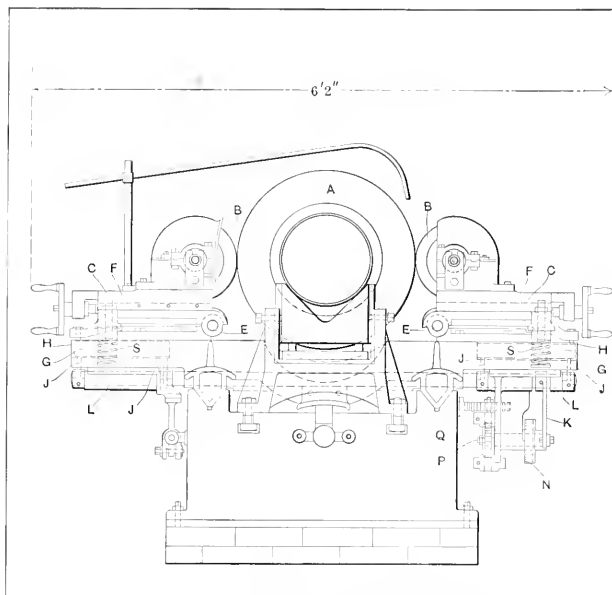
End View of Lobdell Roll Grinding Machine showing Carriage Construction
